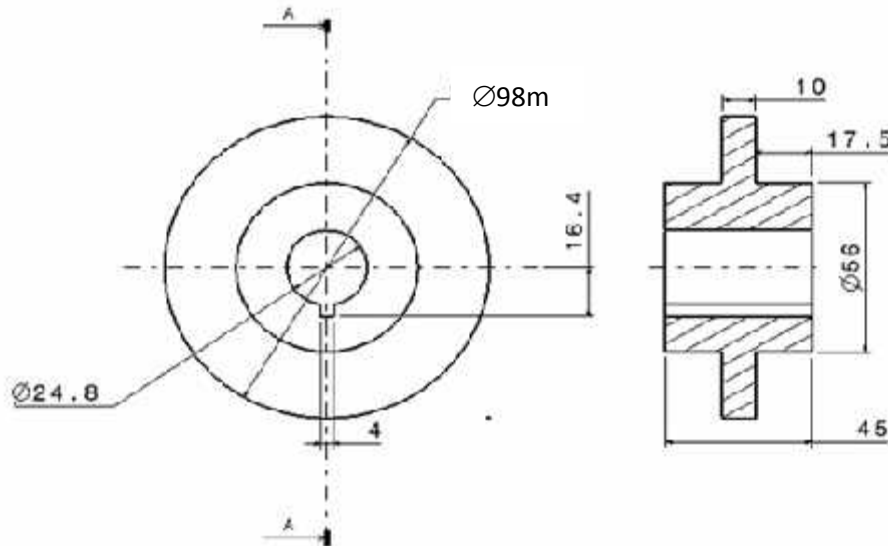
Roller dimensions for twin disc rolling/sliding wear test
